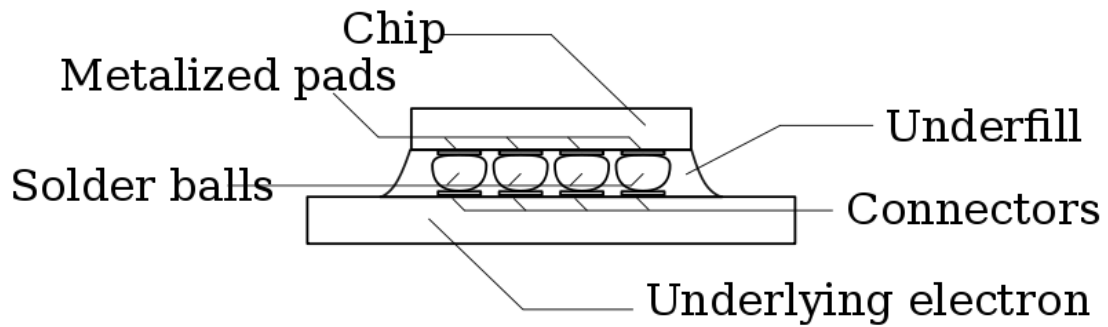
Side-view scheme of a typical flip chip mounting [3]
